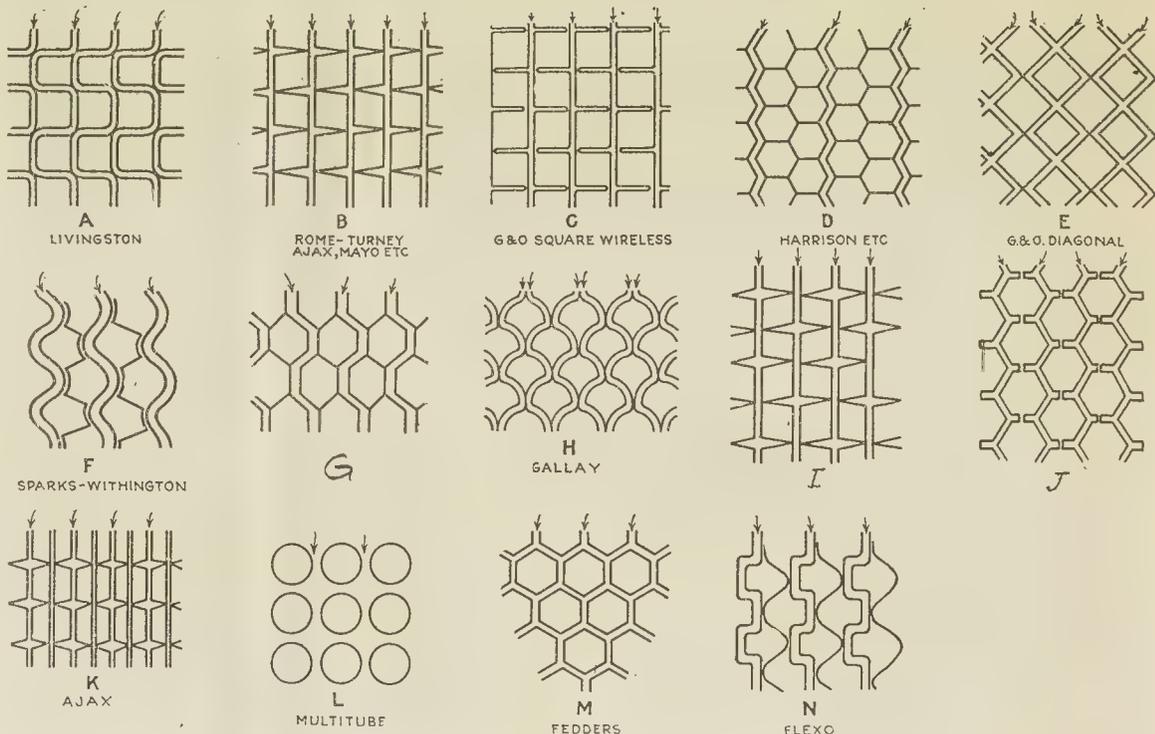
Types of Honeycomb Radiator. These Are Drawn Slightly Out of Scale to Show the Water Passages Clearly
